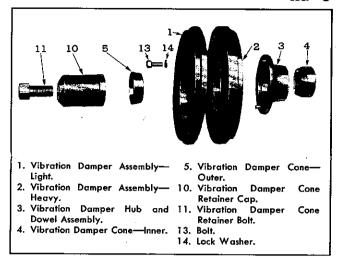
Vibration Damper Details and Relative Location of Parts.
